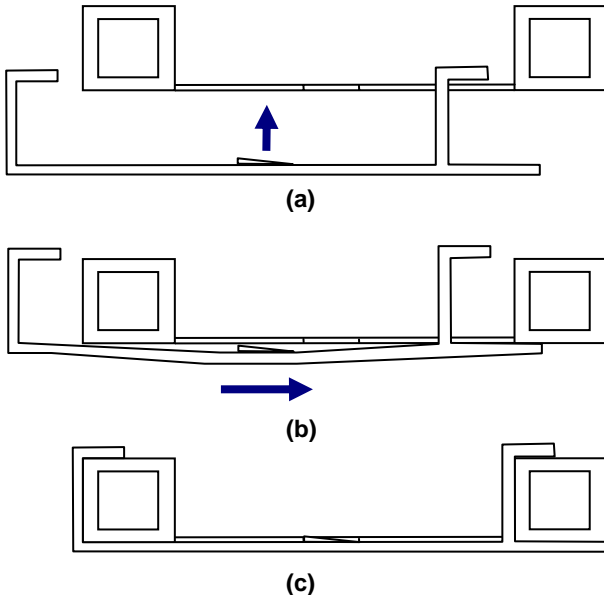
Engagement of heat-reversible snap: (a) push, (b) slide, and (c) lock.
